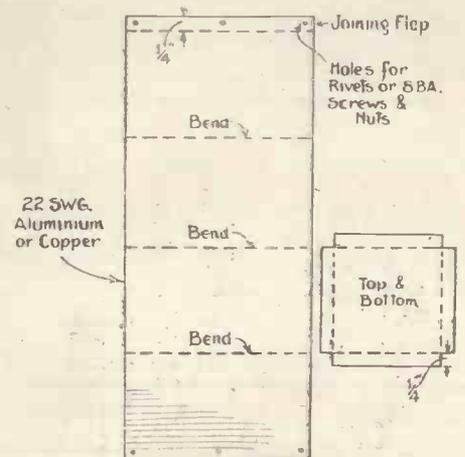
Layout of metal for square can—the top and bottom being separate pieces
